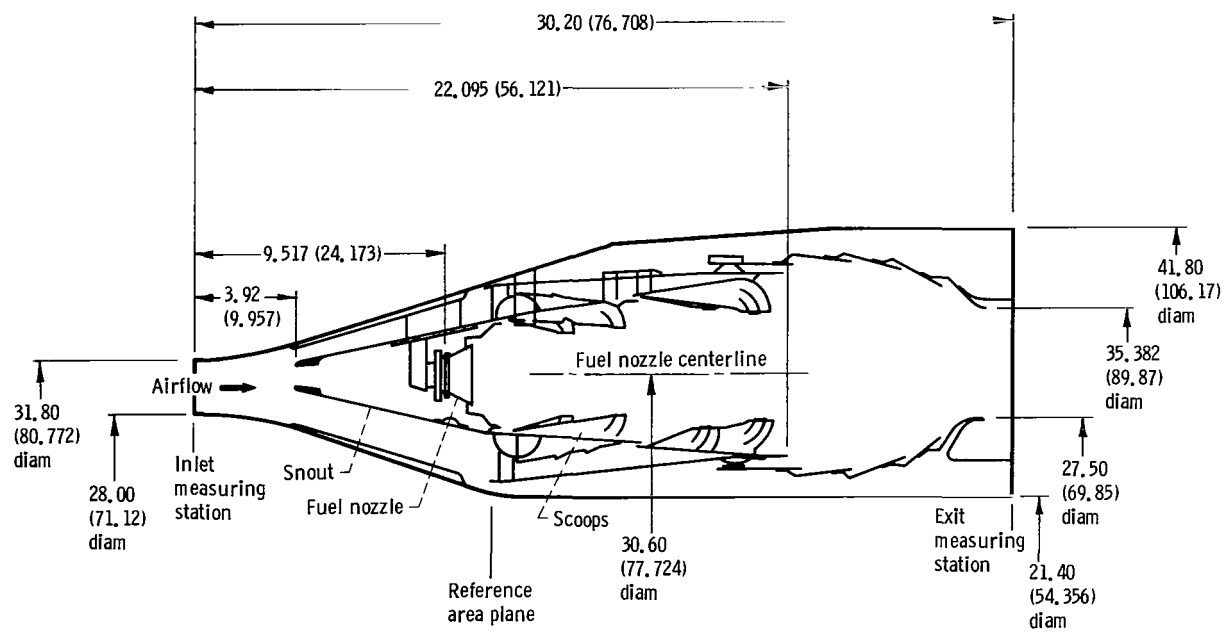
Cross section of combustor. Dimensions are in inches (cm).
